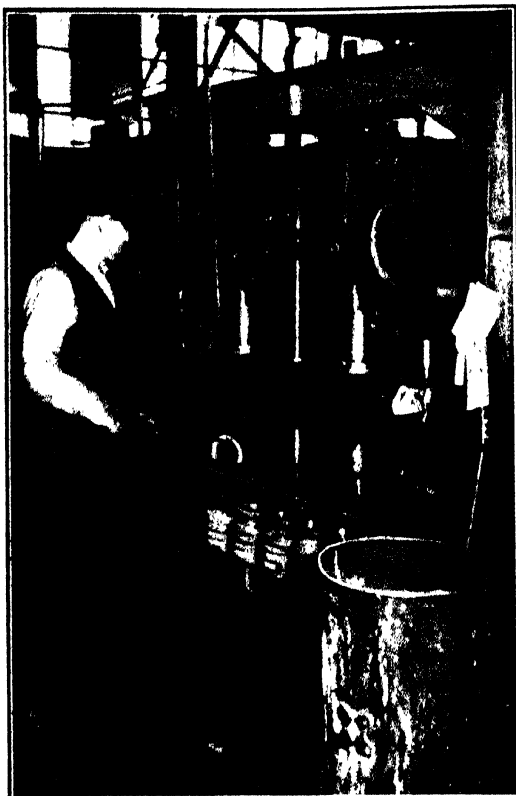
PERSPECTIVE OF QUENCHING MACHINE
